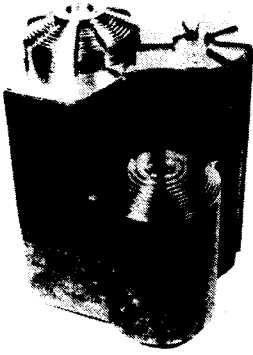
Deep drawing punch fabricated by lamination of metal sheets
